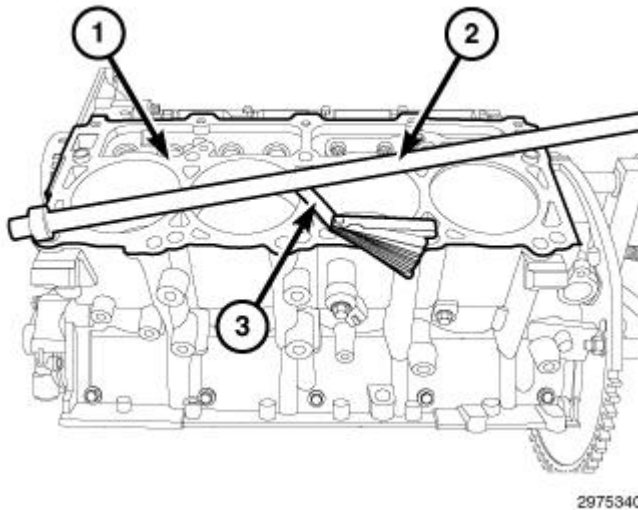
Checking Engine Block Deck Surface With Precision Straightedge & Feeler Gauge
